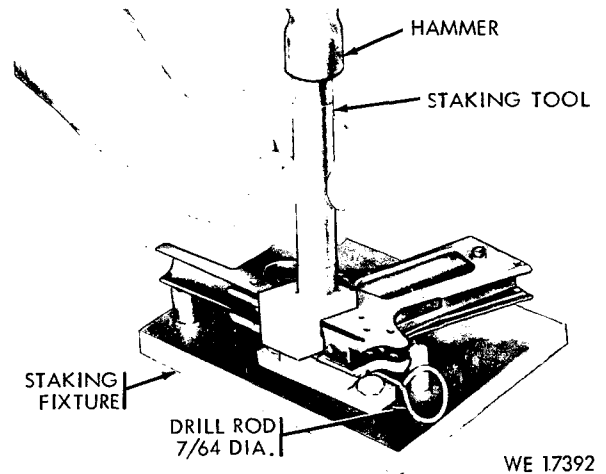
Installing and staking of plunger tube on receiver, utilizing improvised tool for staking plunger tube.
